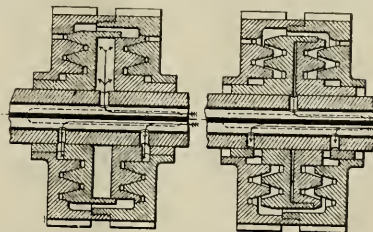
Meyer Type Hydraulically Operated Friction Clutch
